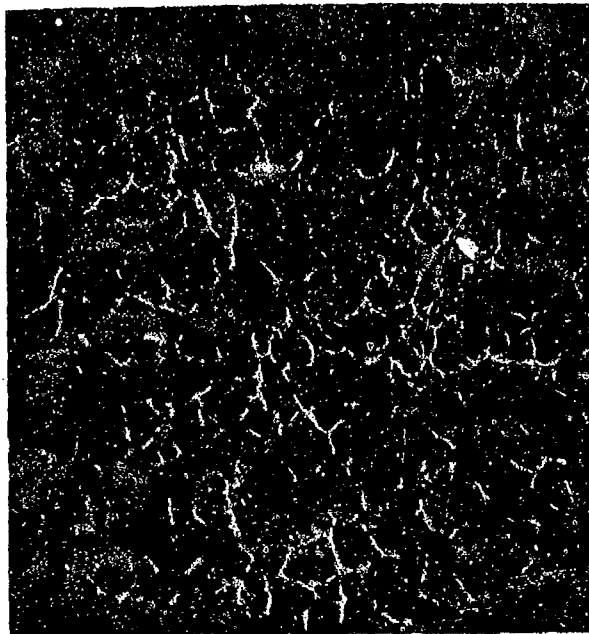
Tensile overload region of AX-110 weld fracture surface, 1500x.
